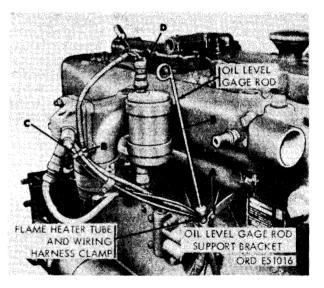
DISCONNECTING OR CON-NECTING INTAKE MANIFOLD FLAME HEATER FUEL TUBES, IGNITION LEAD, AND OIL LEVEL GAGE SUPPORT BRACKET.
